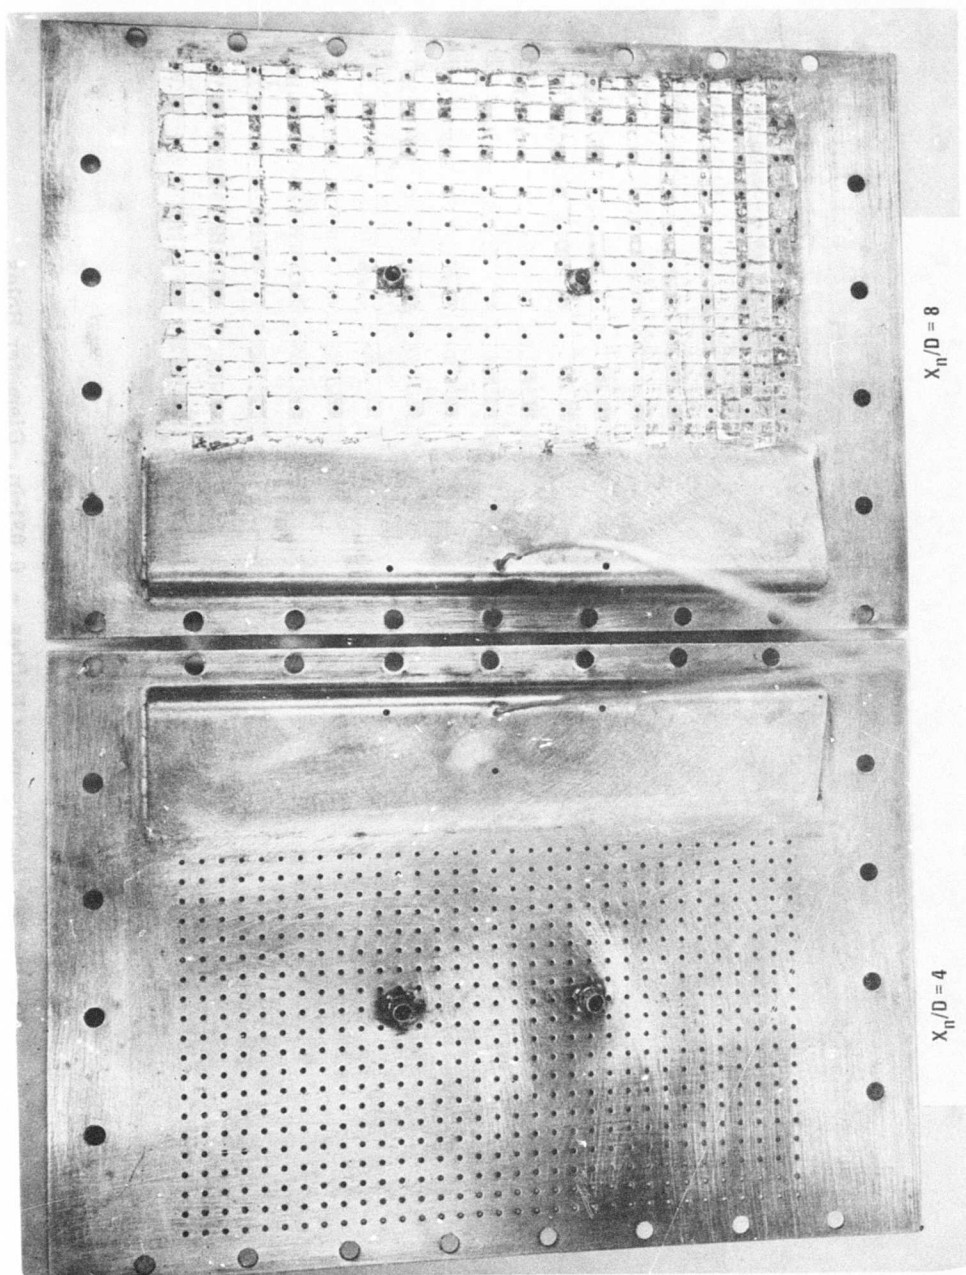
Impingement Baffles - 0.052-In.-Diameter Holes.
